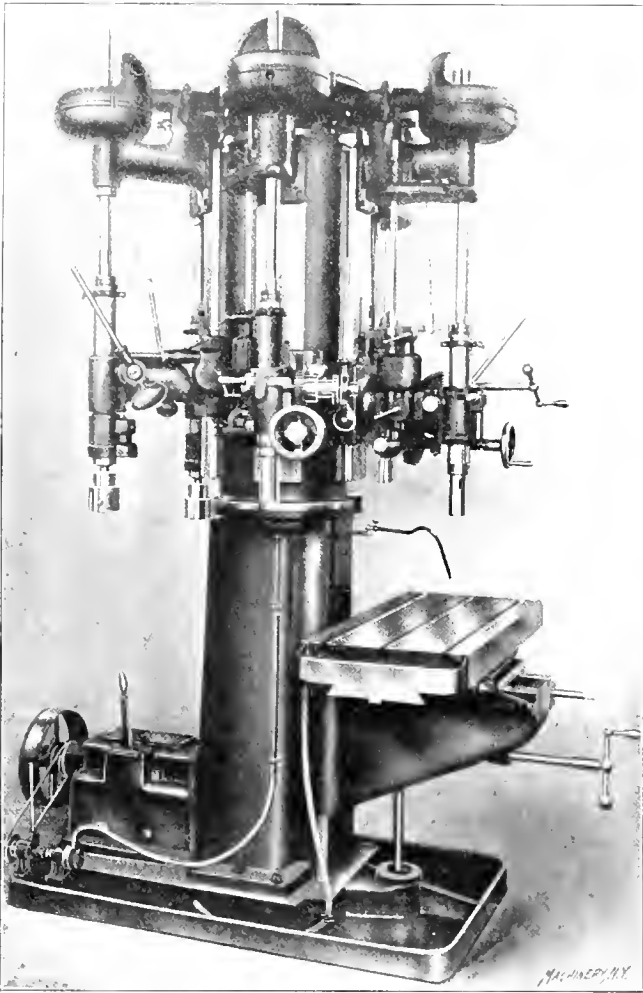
Turret Type of Drilling Machine embodying Turret Principle in Drill Press Design
